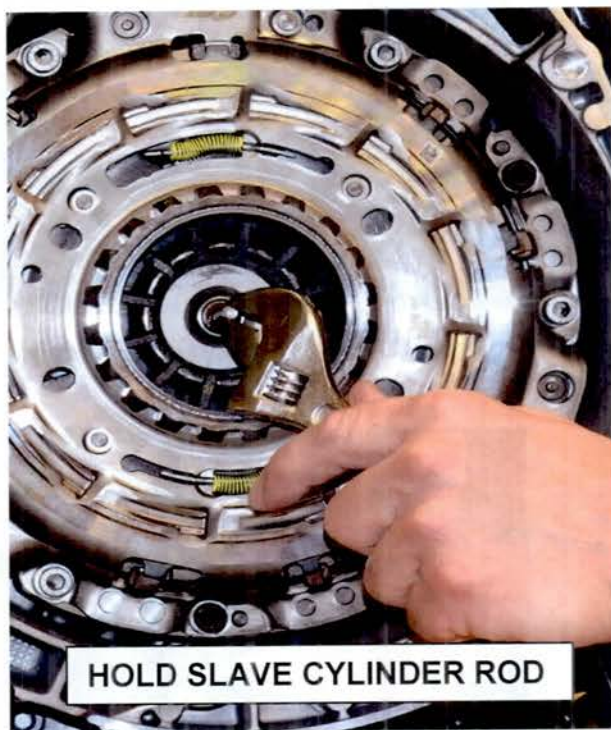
Hold the Slave Cylinder Rod while Unscrewing the Clutch Slave Cylinder Assembly from the Slave Cylinder Rod
